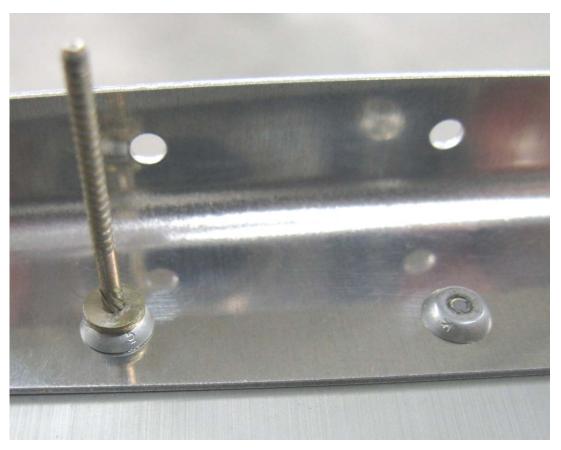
A: CR32XX MANUFACTURED HEAD EXAMPLE
